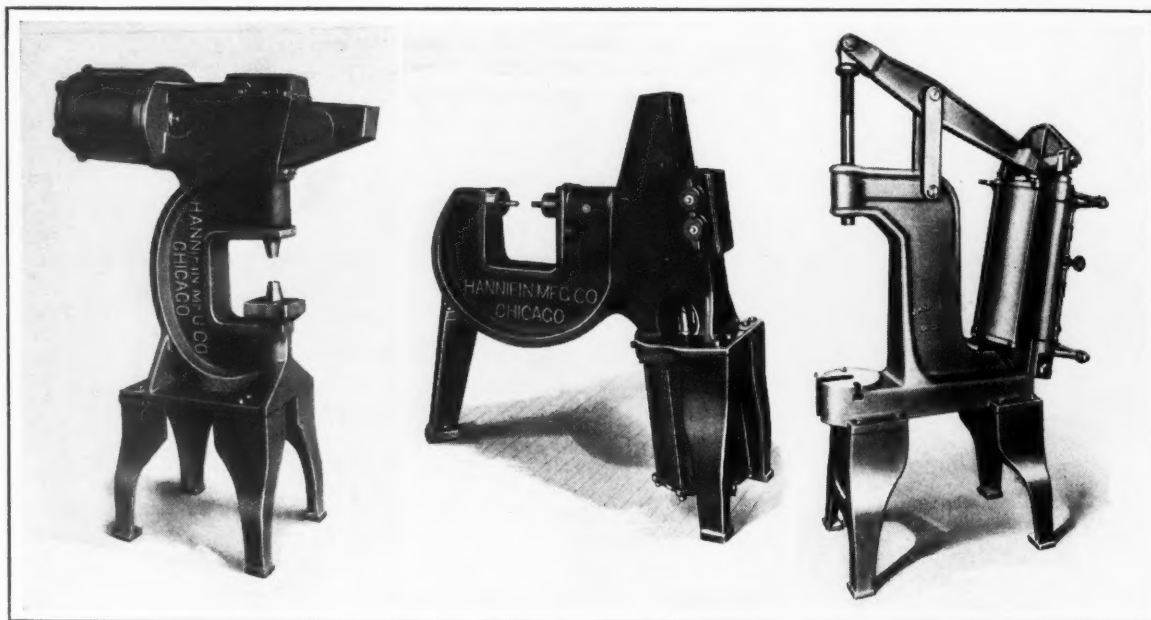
Hannifin Vertical Rivet Press, Horizontal Rivet Press and Hydro-Pneumatic Broaching Press, Reading from Left to Right
